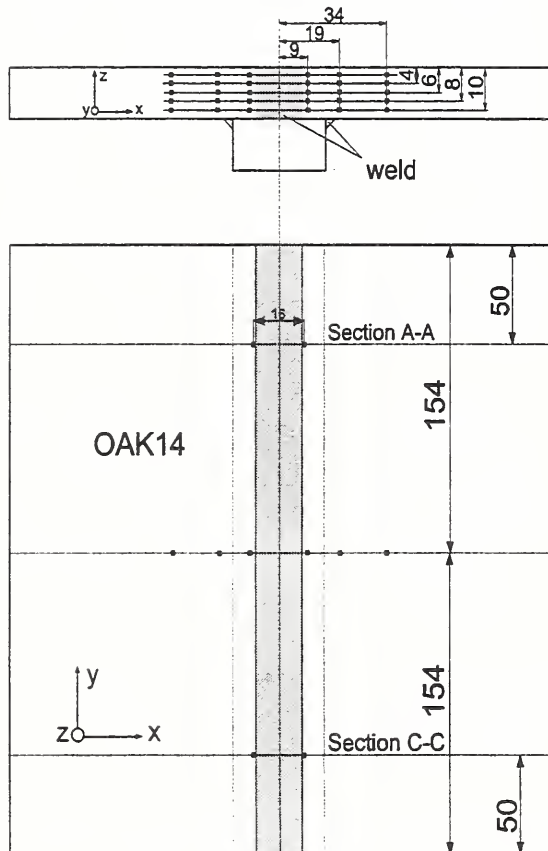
Sketch of the welded plate in butt-weld geometry
